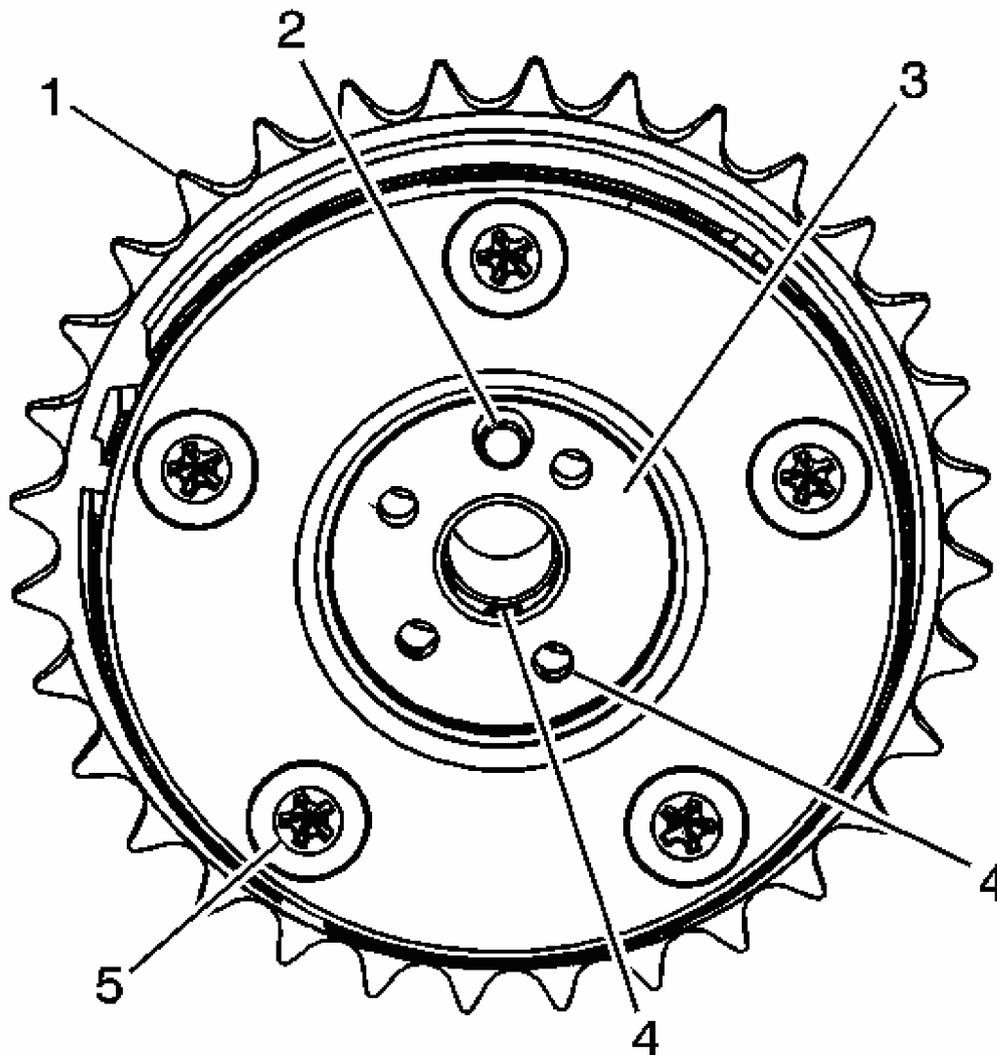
Identifying Exhaust Camshaft Position Actuators Inspection Areas
